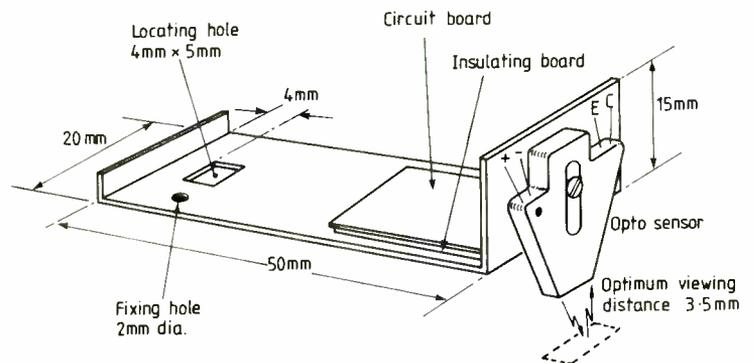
Opto-sensor mounted underneath the platen roller views the paper through a hole cut in the paper guide roller carrier (Fig. 6).
